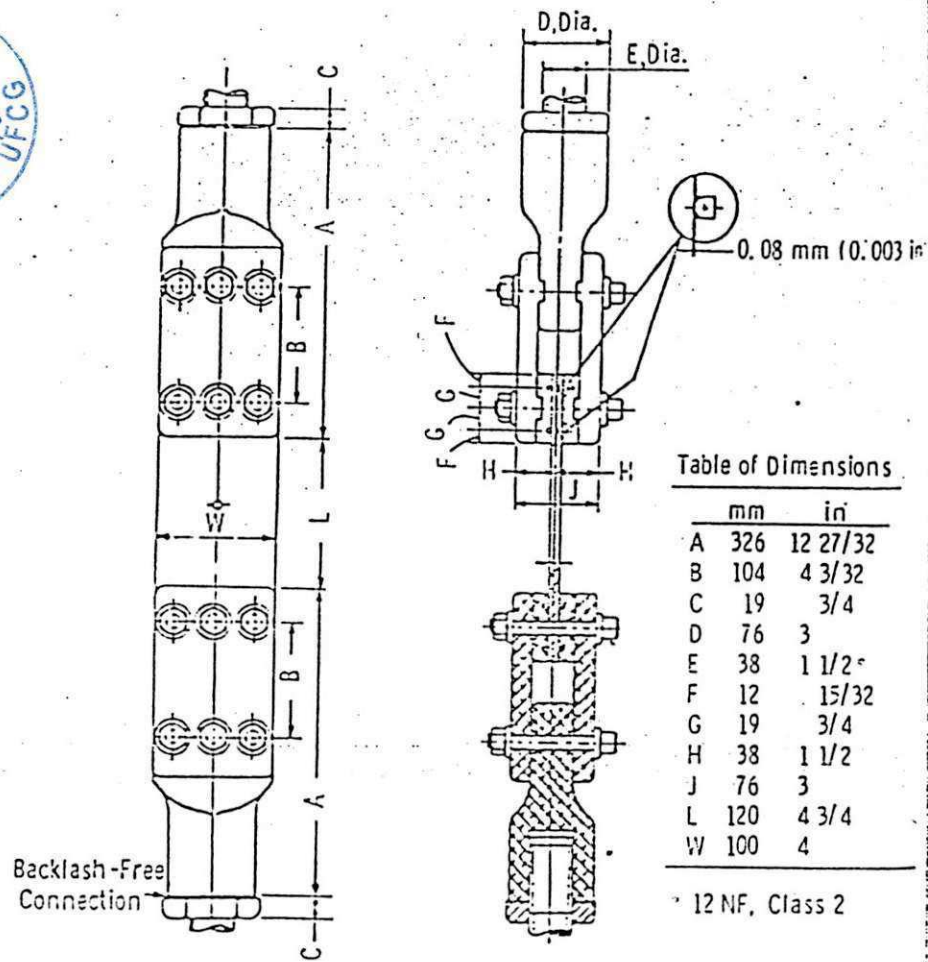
Example of Bolt and Keyway Assembly for Gripping 100-mm (4-in.) wide CCT Specimen
